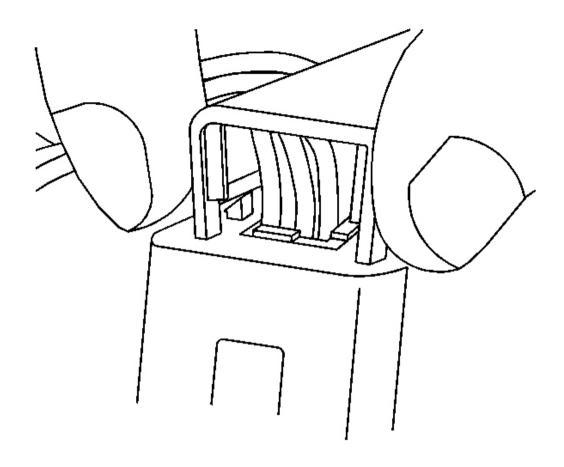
Squeezing Cover Locking Legs Courtesy of GENERAL MOTORS CORP.
